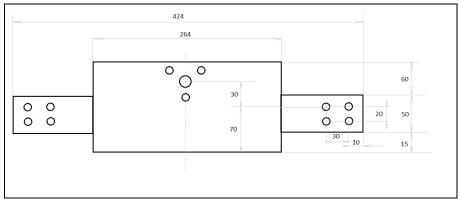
Vehicle version 2 motor support piece layout drawing.
